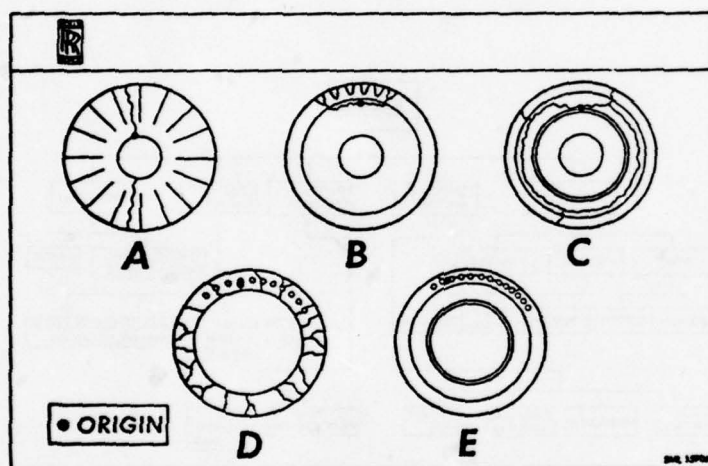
TYPES OF ROTOR FAILURE FOR LOW CYCLE FATIGUE (REF. 4)
